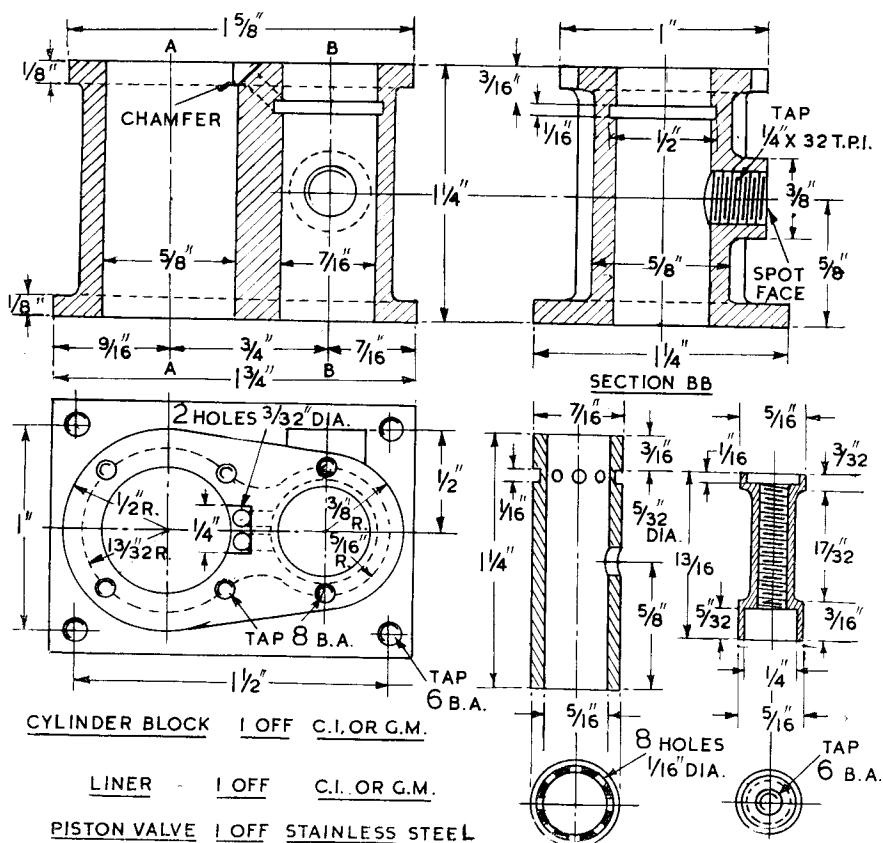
Details of the cylinder block, valve and valve liner of the new Corsair engine.
